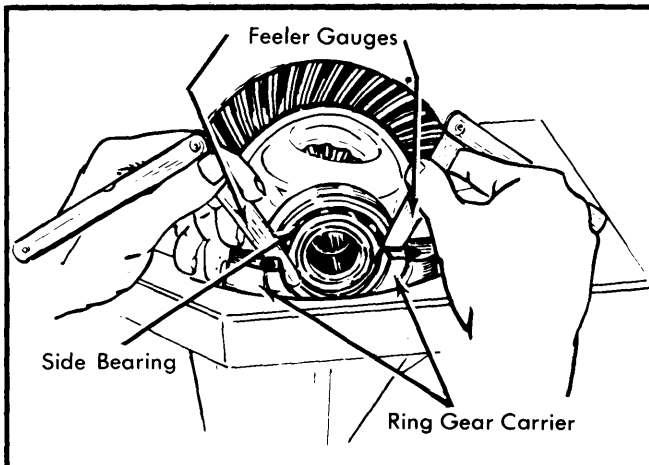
Measuring Clearance Between Side Bearing and Gear Carrier (Type "A" Differentials)
